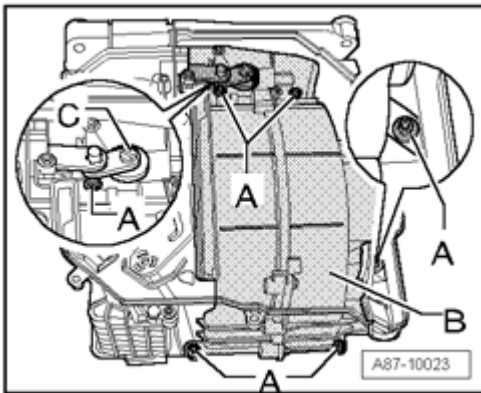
Identifying Bolts, Fresh Air Blower V2, And Connecting Elements
